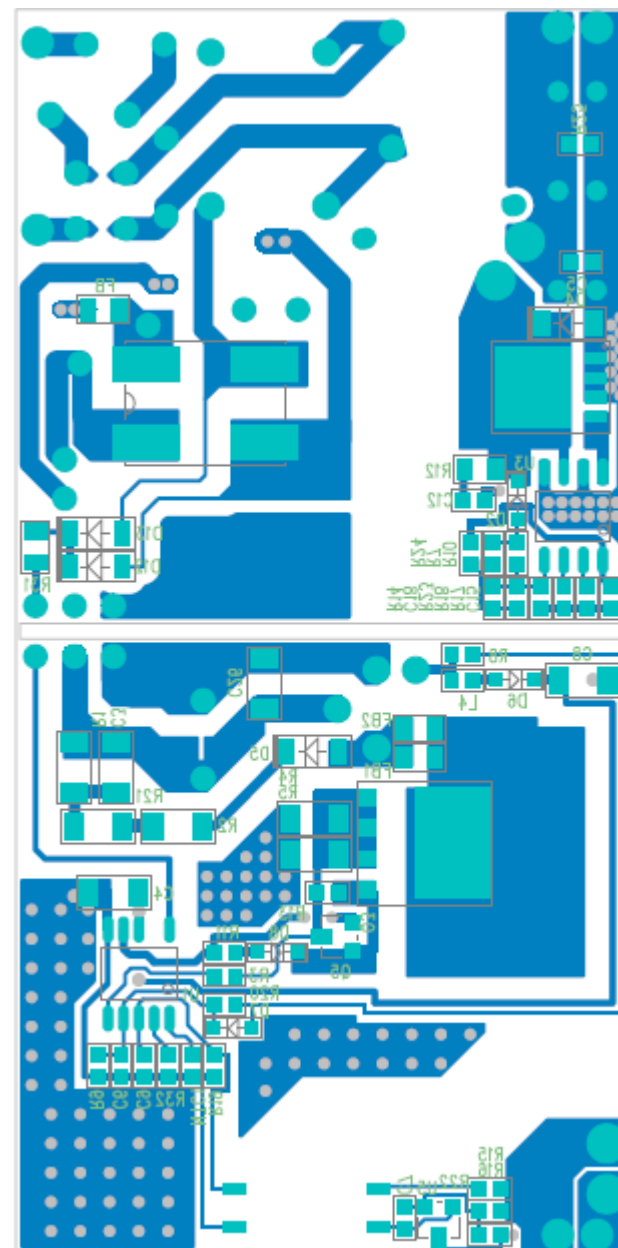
, Bottom View of NCP1340+NCP43080_5V8A's PCB
